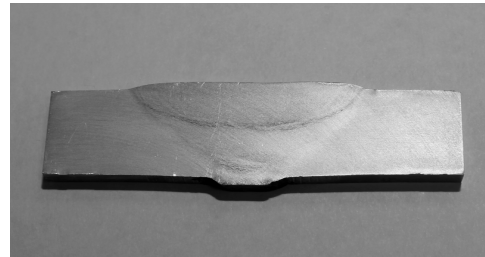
Sample of plasma welding connection made on DC of reversed polarity
